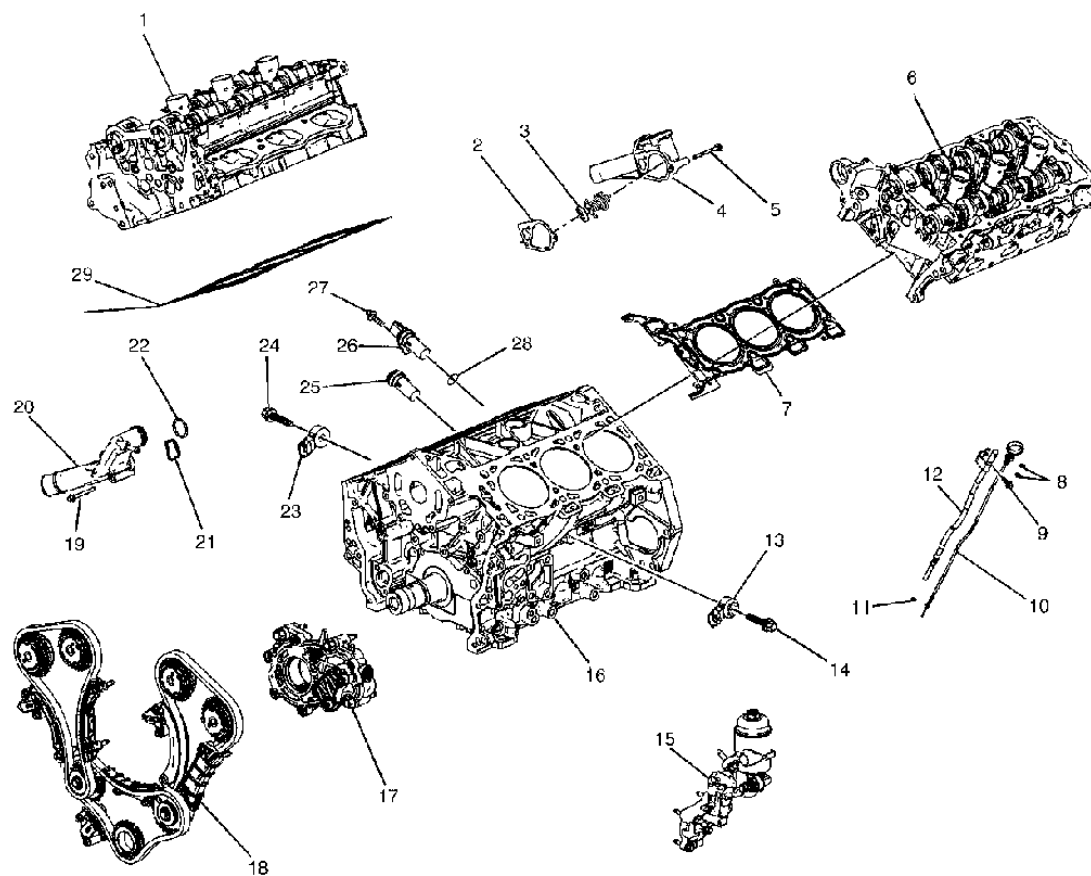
Engine Covers and Component Assemblies (1 of 2)
